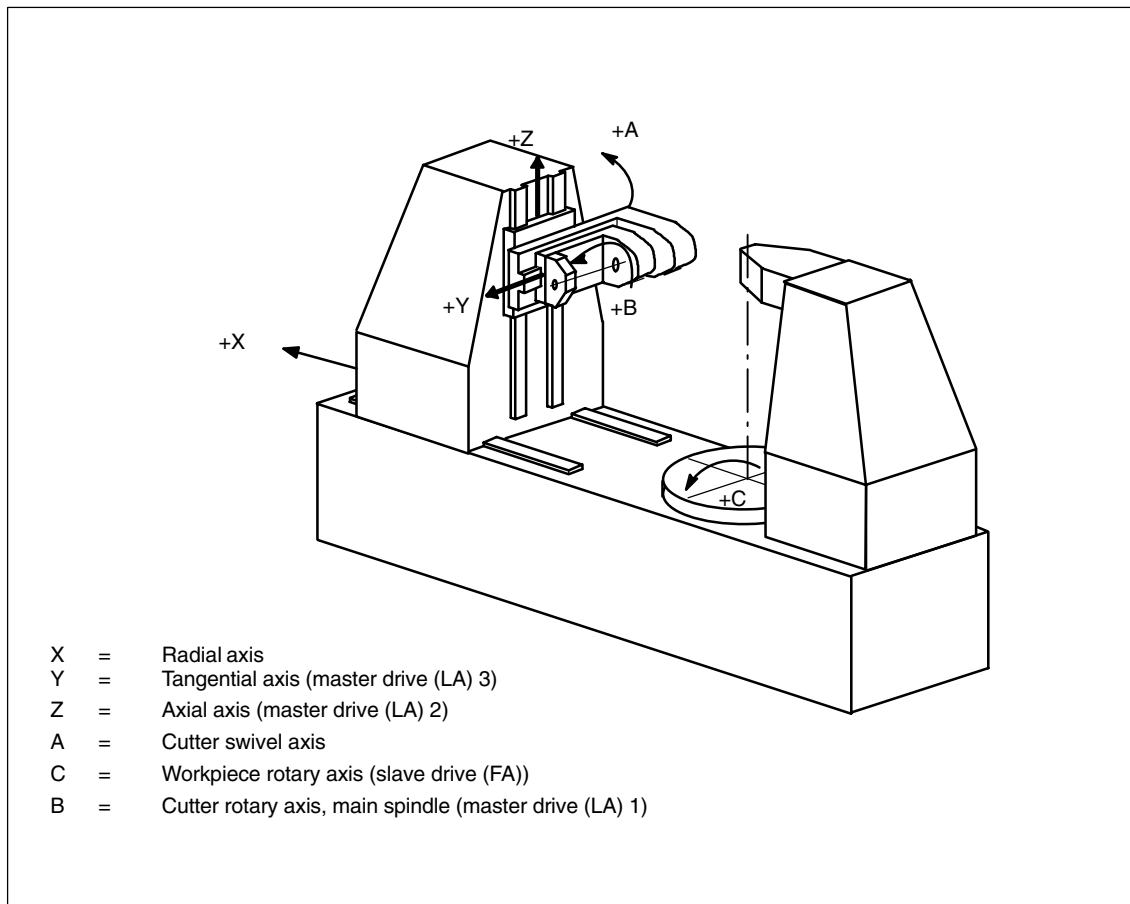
Definition of axes on a gear hobbing machine (example)
